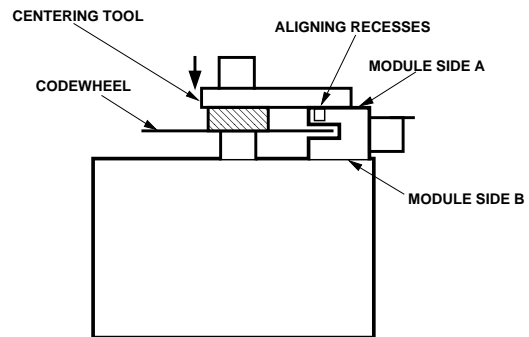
Alignment Tool is Placed over Shaft and onto Codewheel Hub. Alignment Tool Pins Mate with Aligning Recesses on Module.
